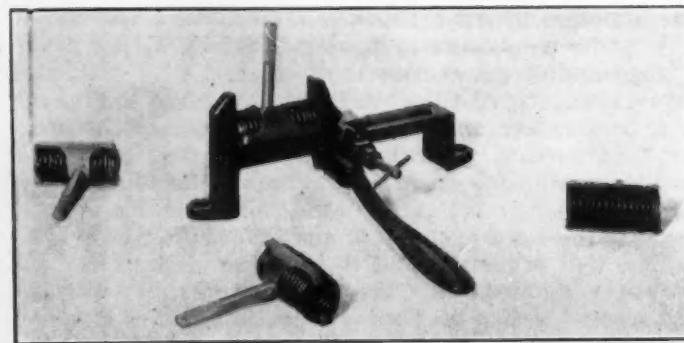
DEVICE FOR COMPRESSING VALVE-SPRINGS
